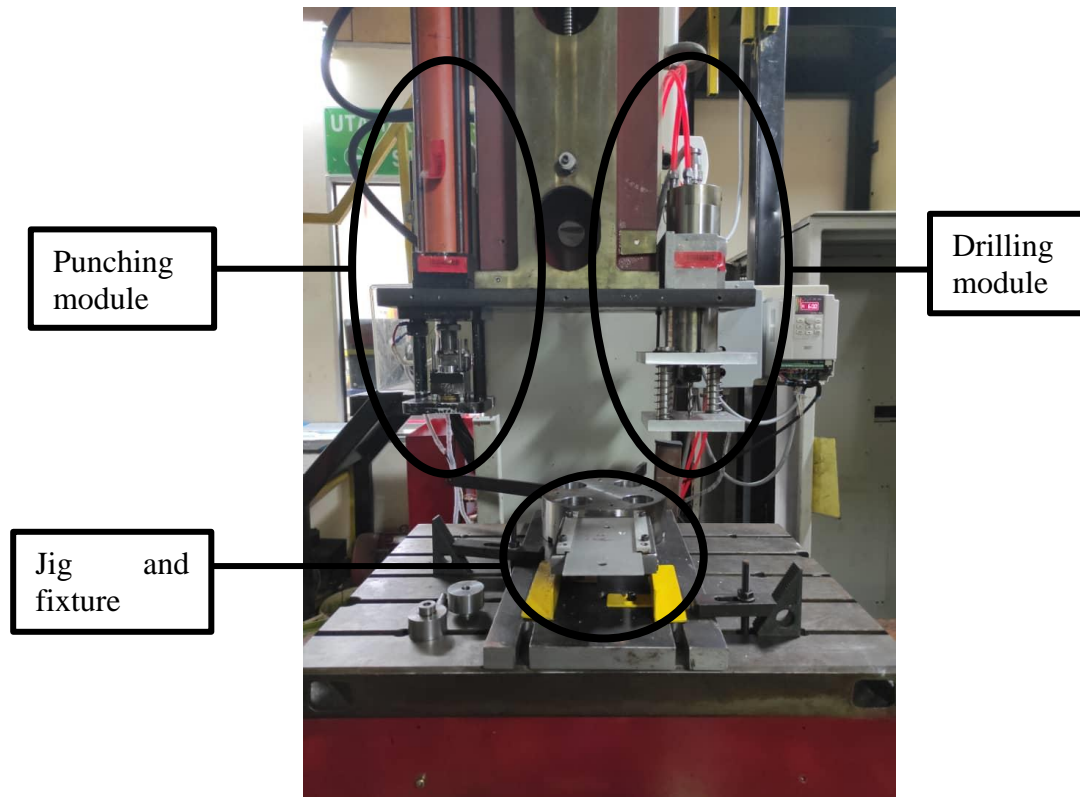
Hybrid machine for combined punching and drilling processes.
